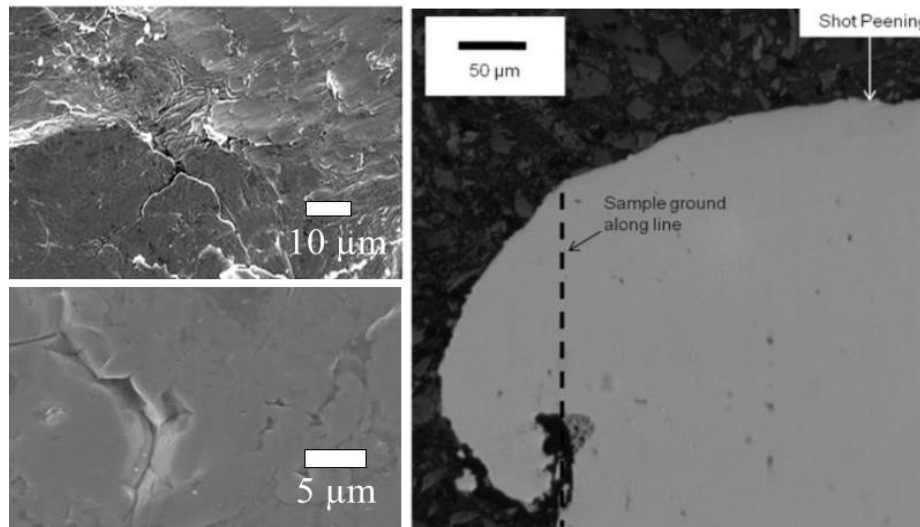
Surface defects such as microcracks (top left), micro notches (bottom left) and rolled edges or shear lips (right) caused by peening [69, 75]
